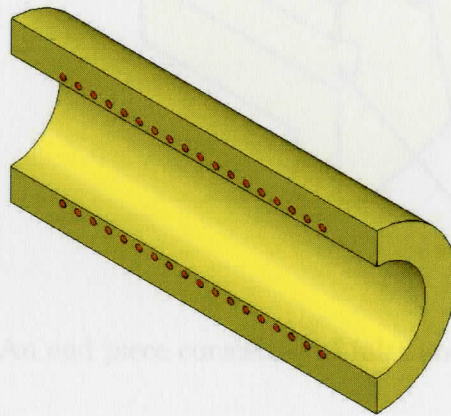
The half sectional drawing of the casing done through vacuum casting with coils embedded
